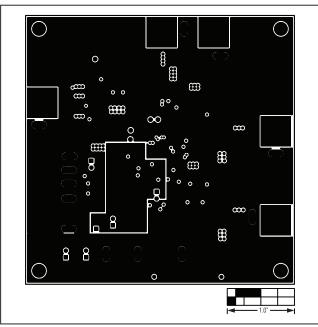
MAX17085B EV Kit PCB Layout—Ground Planes (Layer 2)
